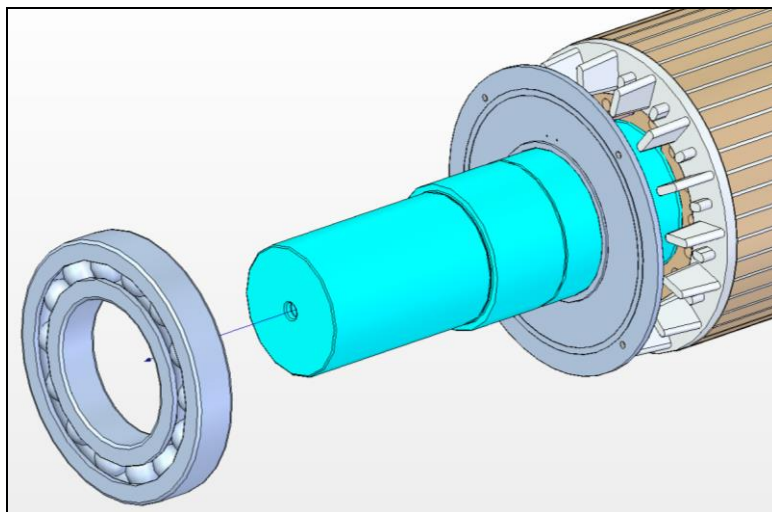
Replacing bearings on MAC QM motors (steps 7 and 8)
